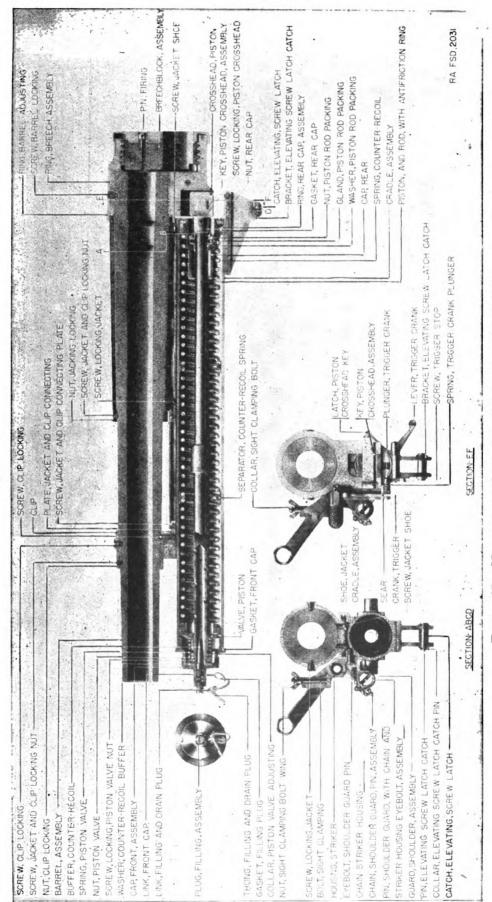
37-mm gun and recoil mechanism-sectioned views.
